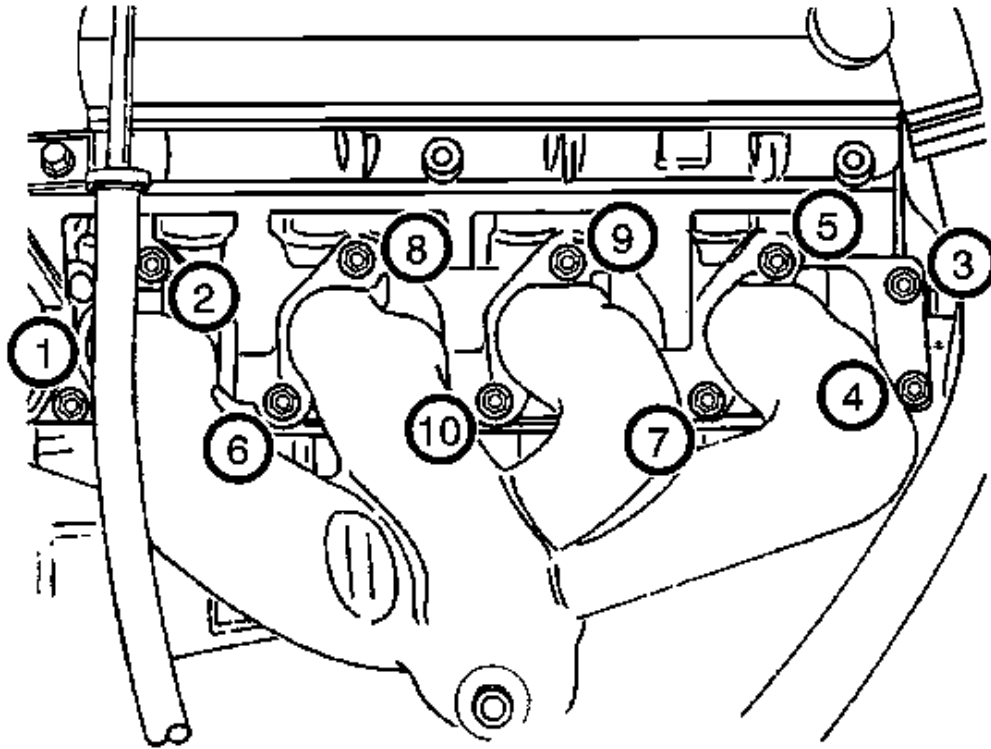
View Of Exhaust Manifold Retaining Nut Removal Sequence
